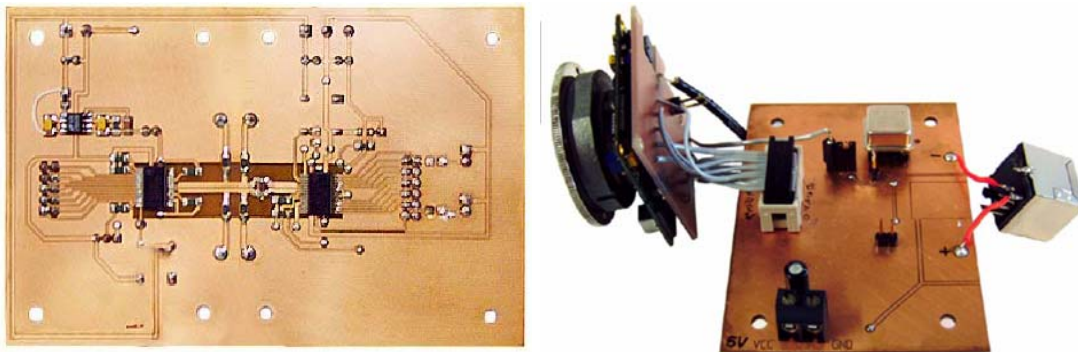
test board for LVDS streaming (left), sender unit after cutting (right) [3]
